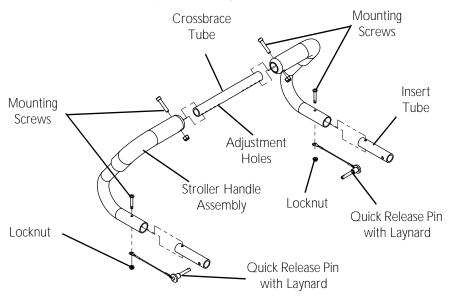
Assembling/Disassembling the Stroller Handle - Non Adjustable Angle Stroller Handle
